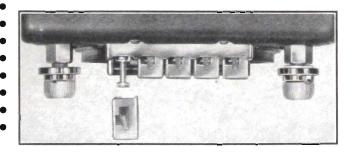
Removing "Push Button" (Also see Fig. 12-115)
